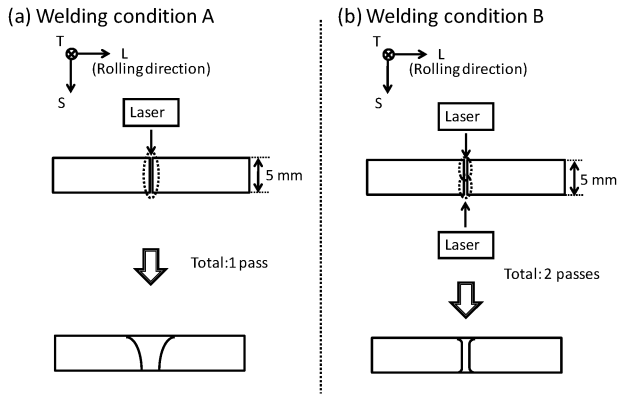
Schematic drawings of laser welding conditions (a) A and (b) B employed in this study.
